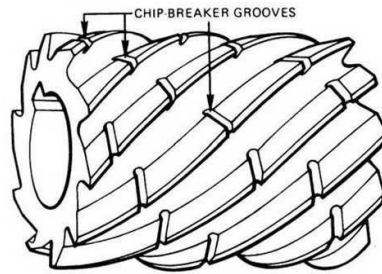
Chip breaking grooves on a plain helical milling cutter
